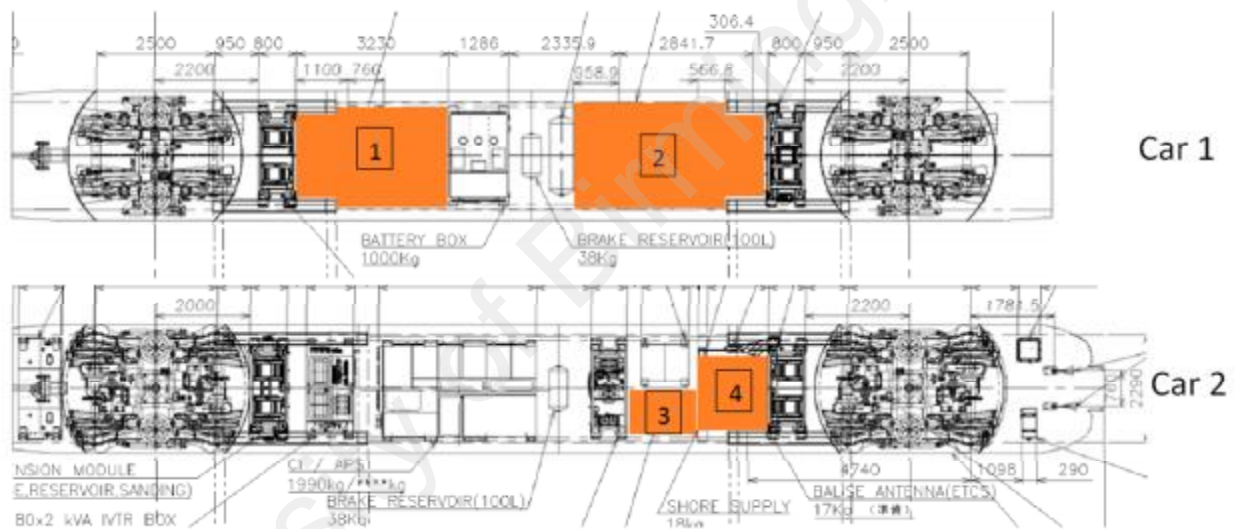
AT200 Plan View of Space Available on Underframe (Hitachi Rail, 2016)
